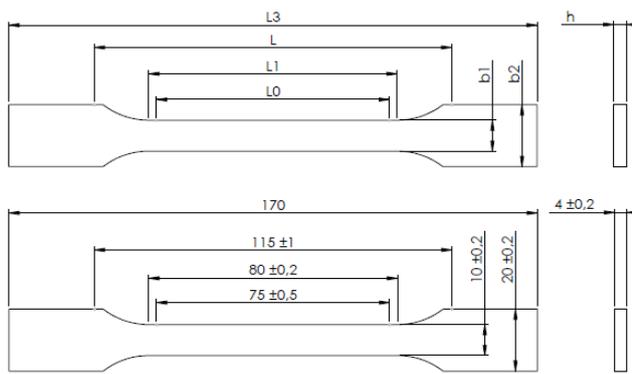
Sample dimensions according to ISO 527-2 type 1A
